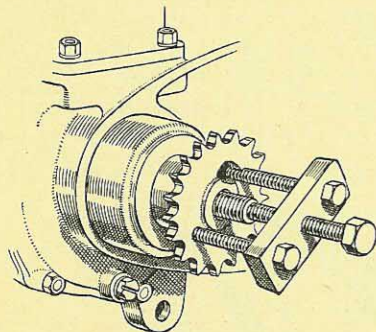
REMOVAL OF ENGINE SPROCKET.
